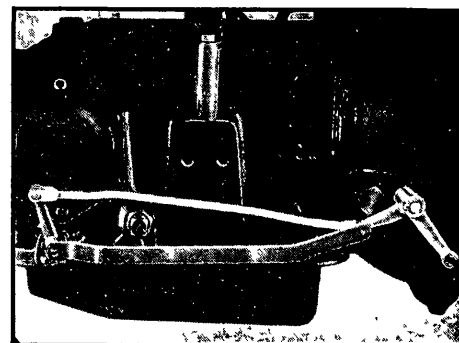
C Throttle valve lever adjustment is correct when gauge fits linkage as shown
